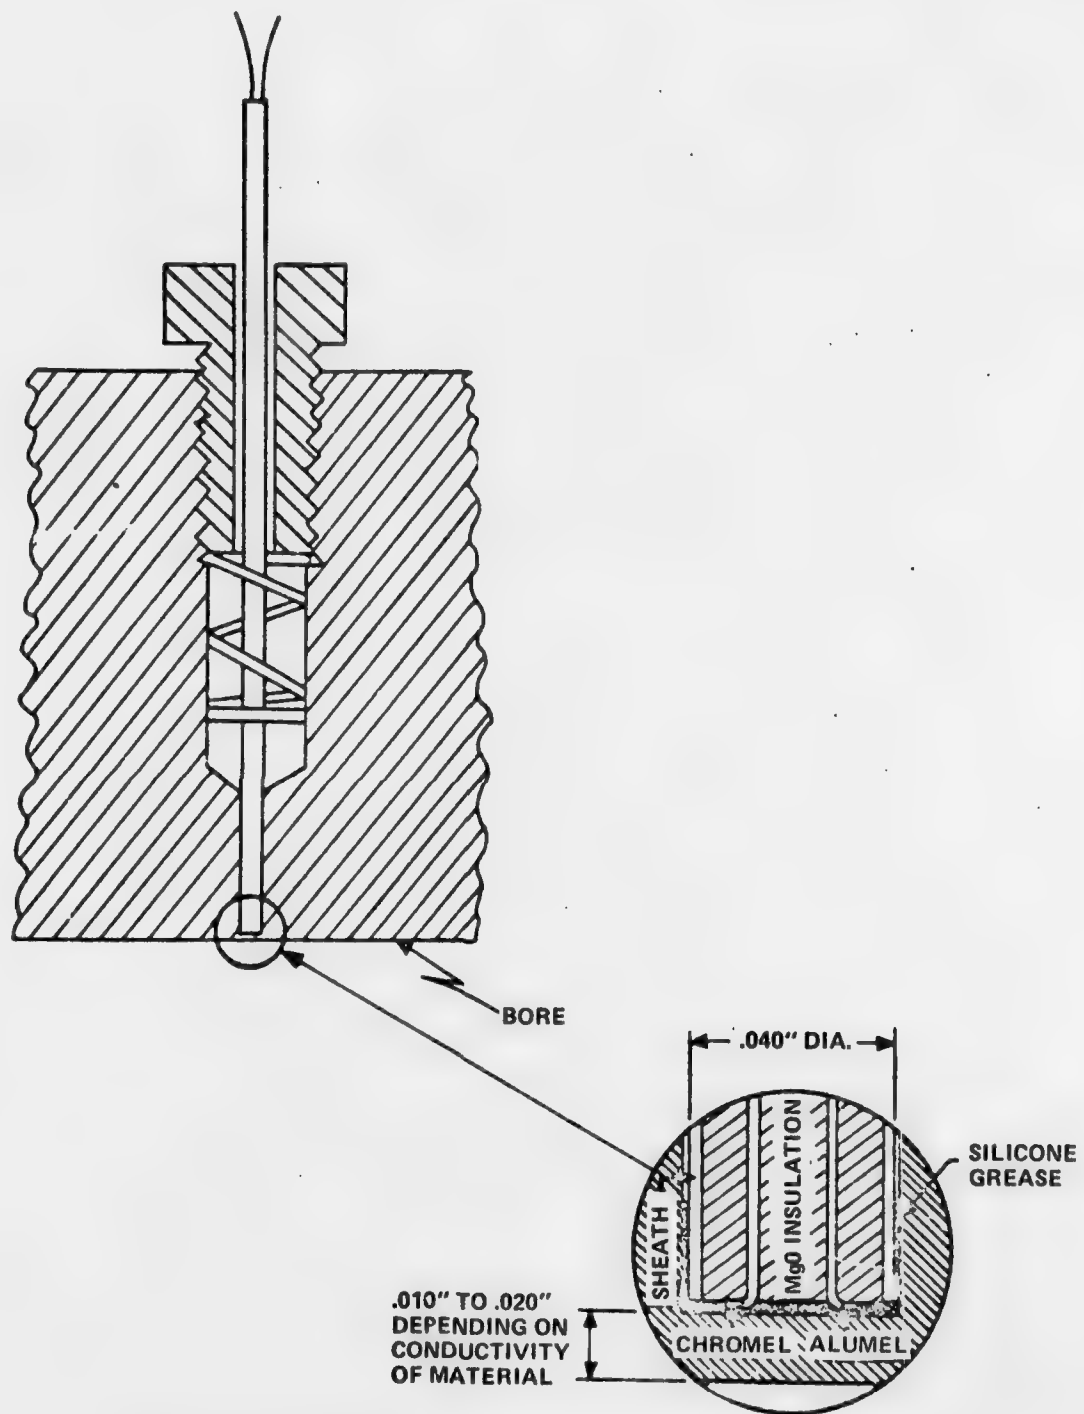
TYPICAL IN-WALL THERMOCOUPLE INSTALLATION
